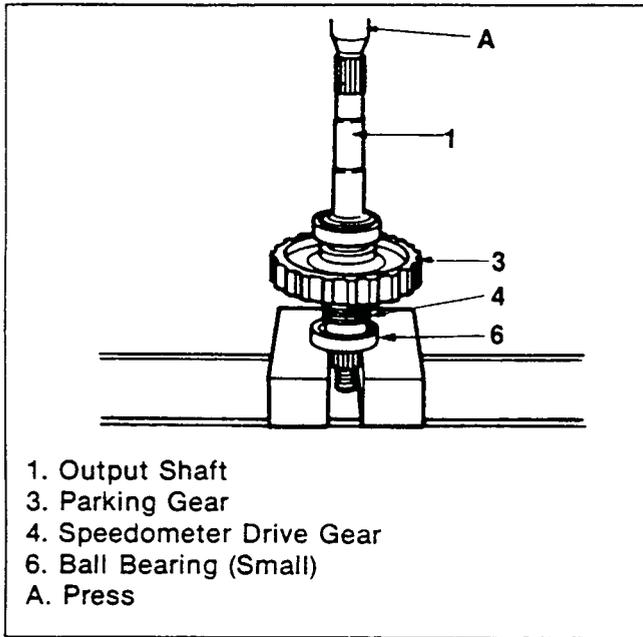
Speedometer Drive Gear and Parking Gear Direction
